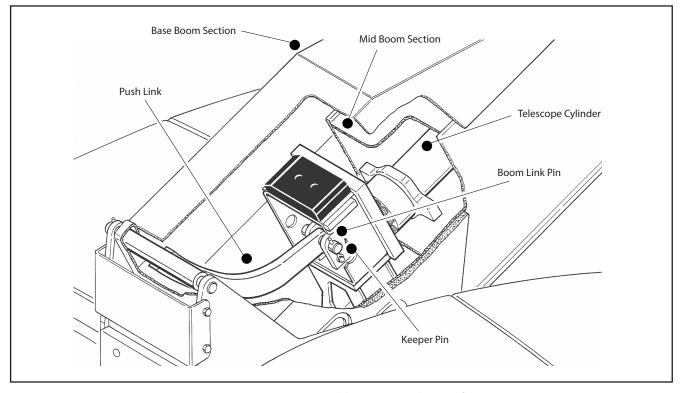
Boom Assembly Cutaway - Sheet 3 of 3
